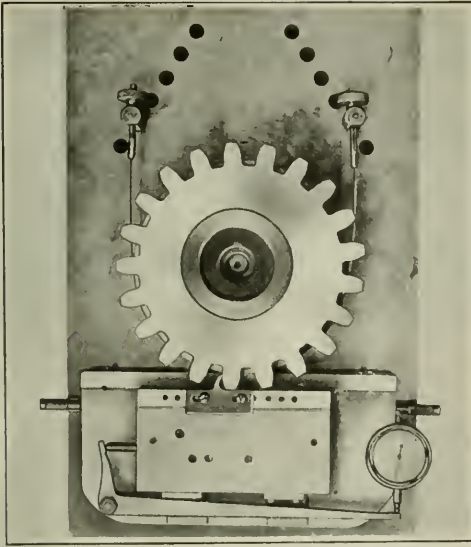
Testing the Involute Tooth Form of a Spur Gear
